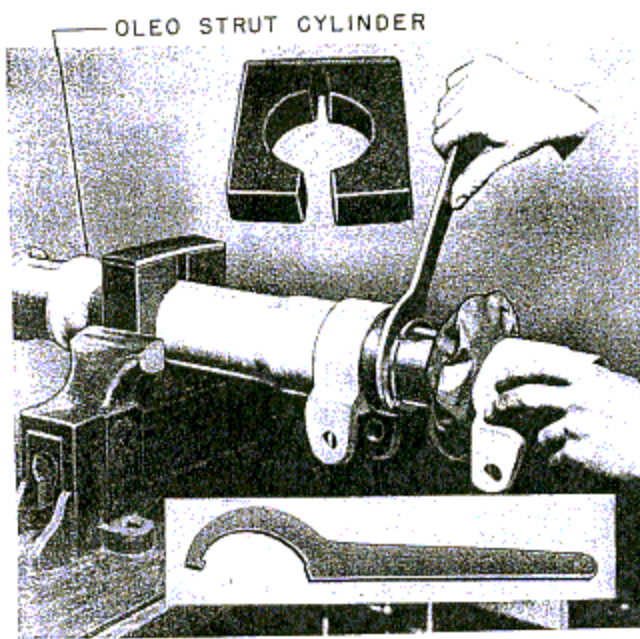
Vise Blocks, P-16244, and Cylinder Bearing Nut Spanner Wrench, P-14845
